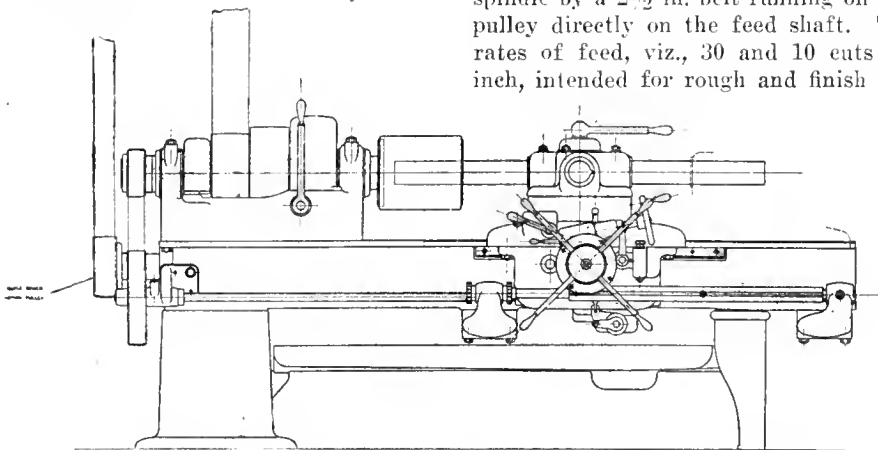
OUTLINE DRAWING OF NO. 5 SHELL BORING LATHE.
